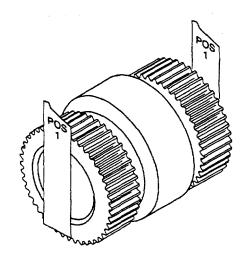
Tail Rotor Driveshaft Coupling Shaft
